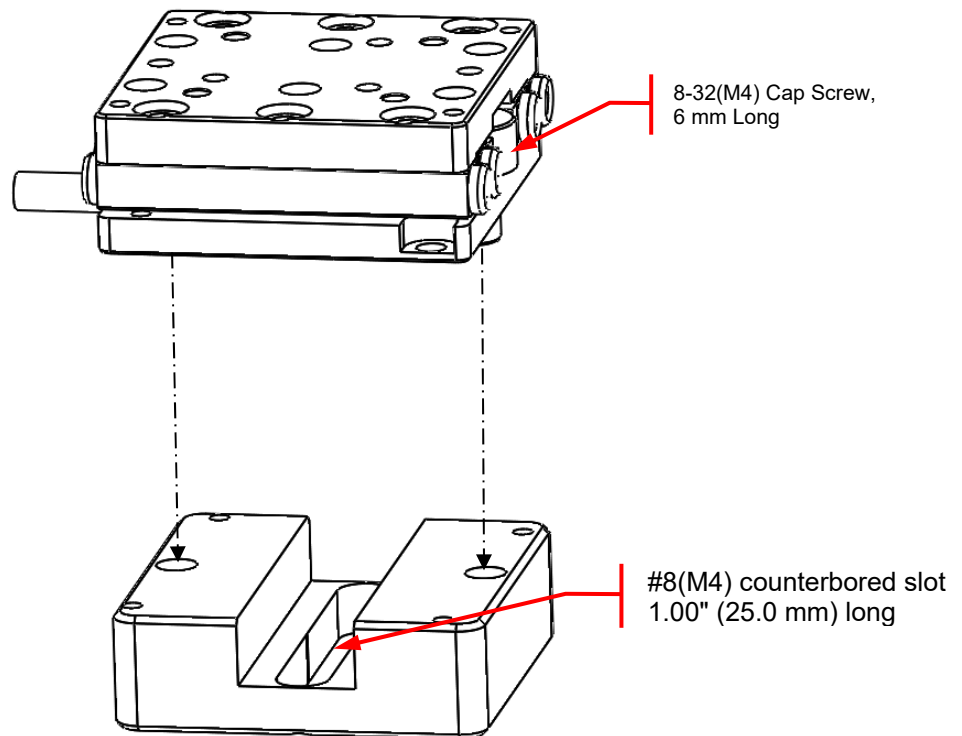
Mounting Adapter PD1U(/M) on Moving Platform
